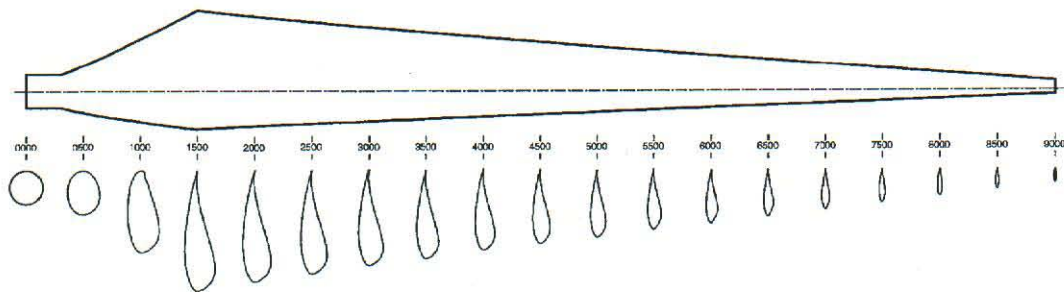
ERS-100 Blade Planform and Airfoil Sections
